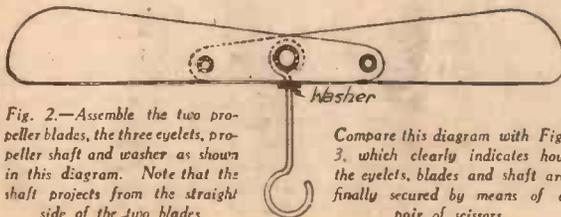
Assemble the two propeller blades, the three eyelets, propeller shaft and washer as shown in this diagram. Note that the shaft projects from the straight side of the two blades.
